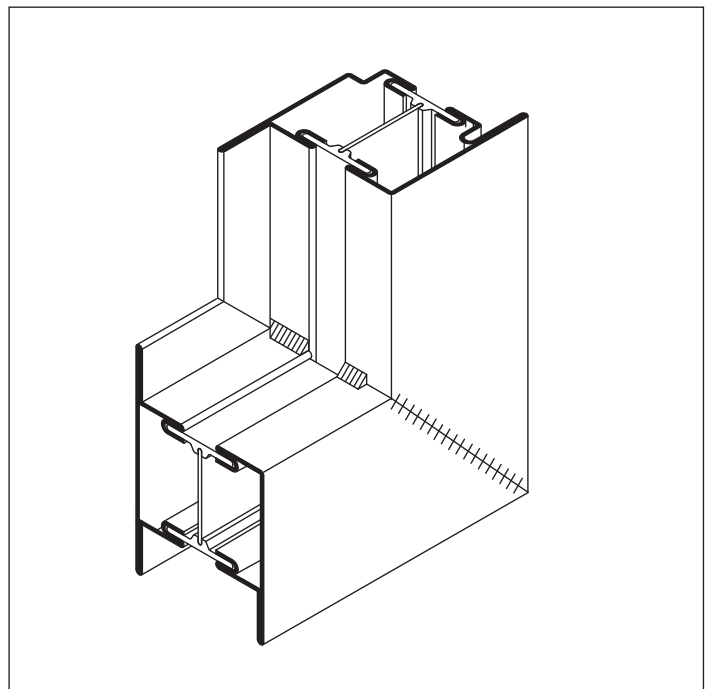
Janisol door leaf frame welded in the glazing rebate
